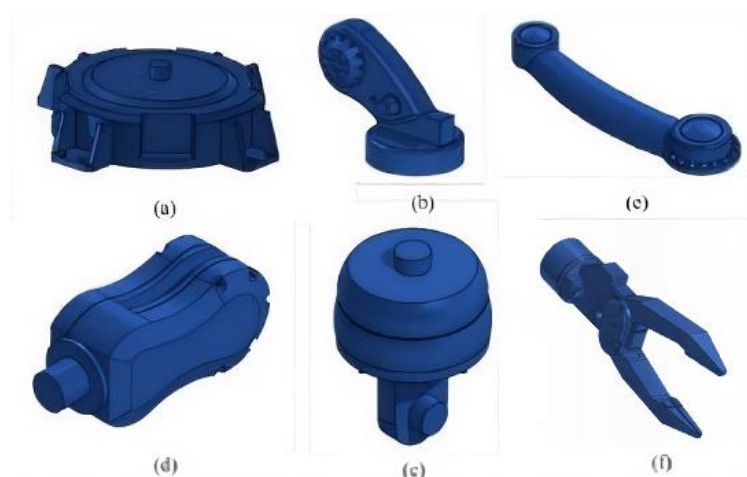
CAD models of robotic arm components for sheet metal cutting: (a) base, (b) shoulder link, (c) arm link, (d) wrist housing, (e) connector, and (f) cutting end effector.
